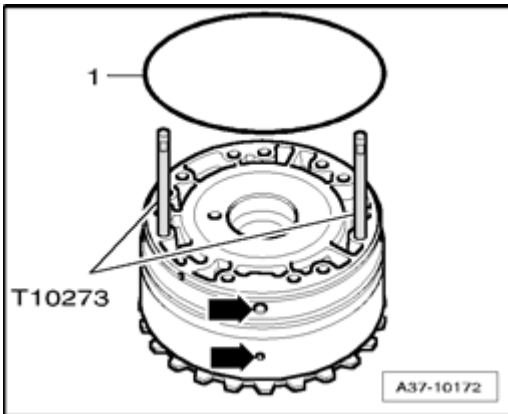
Clutch "F" O-Ring And Guide Pins T10273
